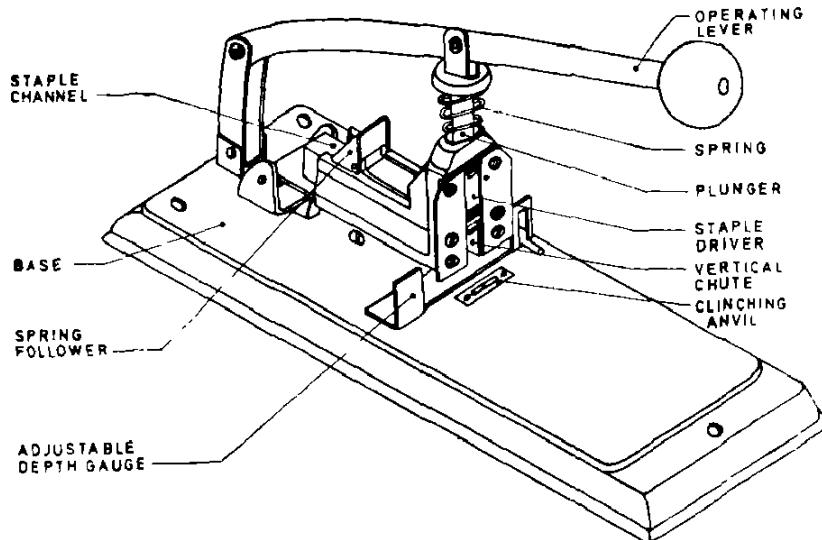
NOMENCLATURE OF STAPLER, DESK TYPE, HEAVY DUTY
